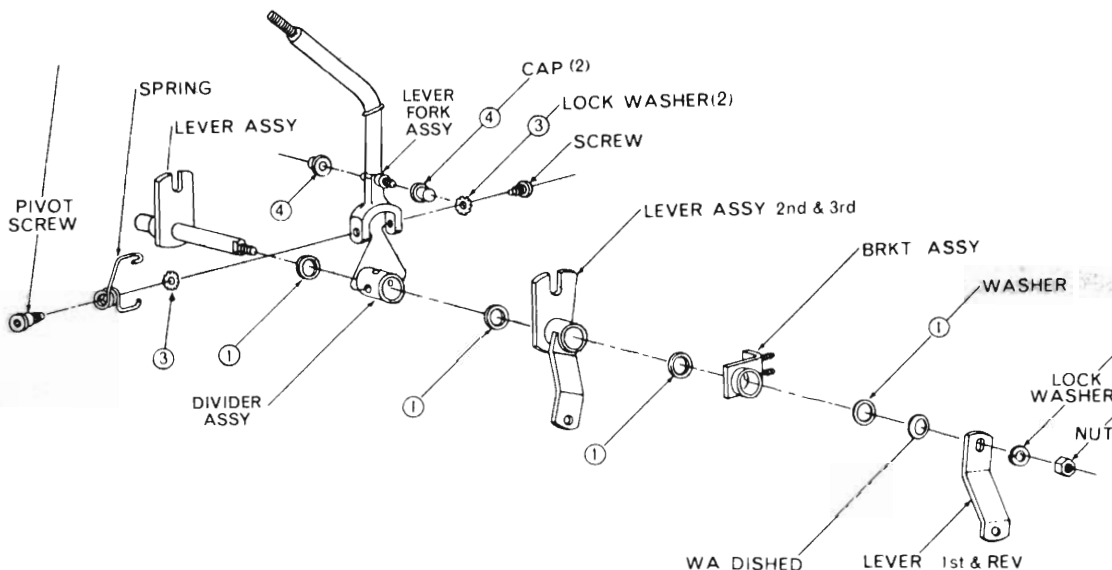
Selector lever bracket lever assembly (dis-assembled view)
